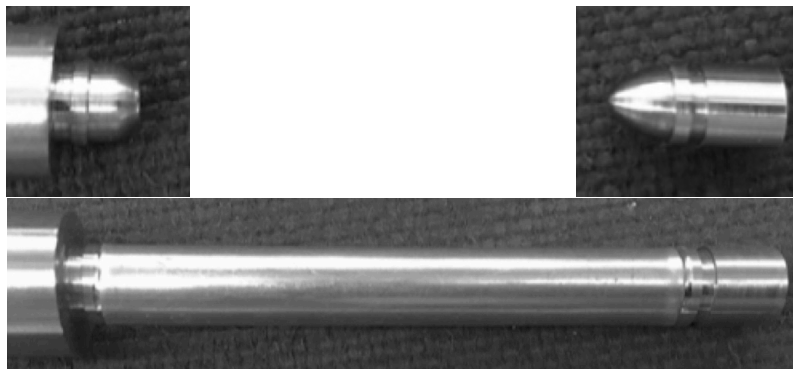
Designs of the bullet collar (left) and cap (right) of the membrane probe.
